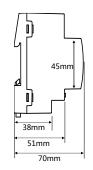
Dimensions - Front View Figure 3. Dimensions - Side View
